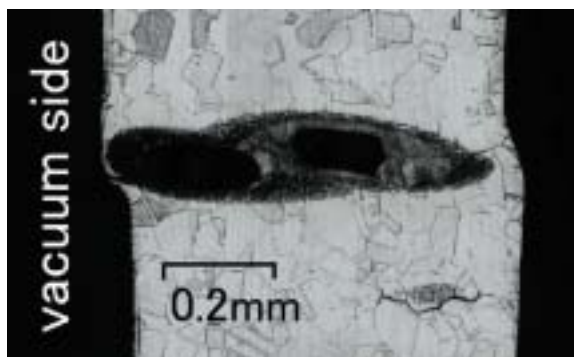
Details of cross-section of stainless-steel chamber wall at the broken part.
